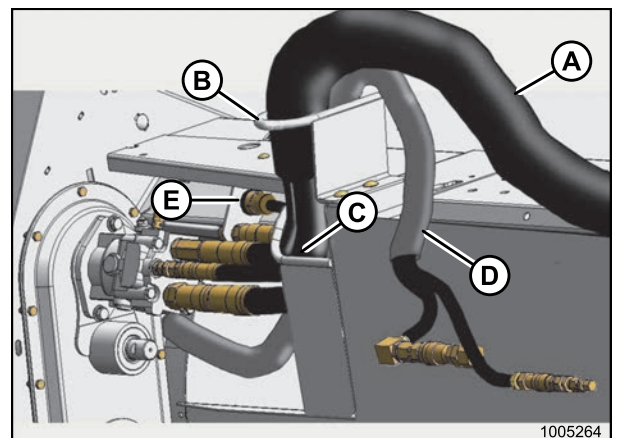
Hose and Electrical Bundle – 14-Ft. and 16-Ft. Header Shown (18-Ft. Similar)
